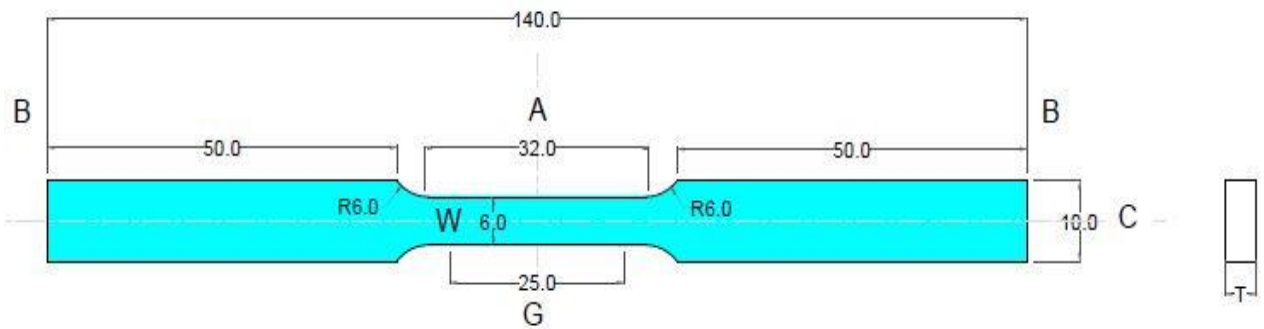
Dimensions of the tensile test specimen according to ASTM E8 (dimensions in mm).
